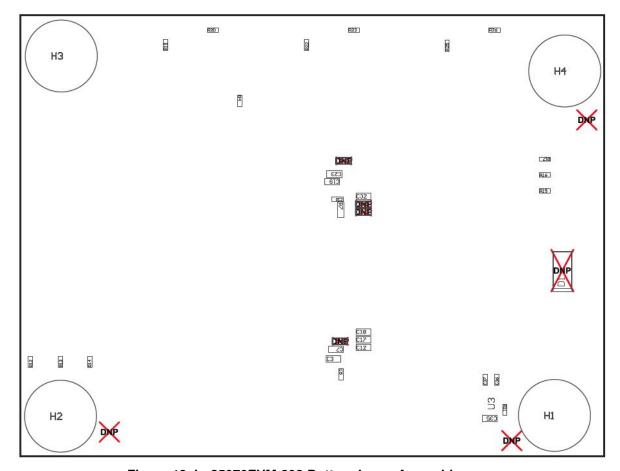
bq25970EVM-893 Bottom Layer Assembly
